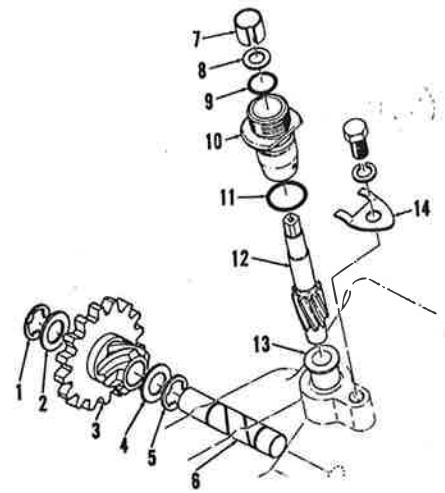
View of kickstarter assembly used on early models.
